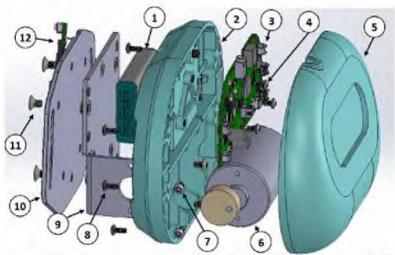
Exploded view of vibration pack showing (clockwise from top): (1) Battery pack (2) Bottom half of housing (3) PCBA (4) PCBA screws x 3 (5) Top half of housing (6) Motor (7) Motor mounting screws (2 in total) (8) Housing screws (7 in total) (9) Motor mount plate (10) Back plate (11) Belt attachment screws (6 in total) (12) Force sensor.
